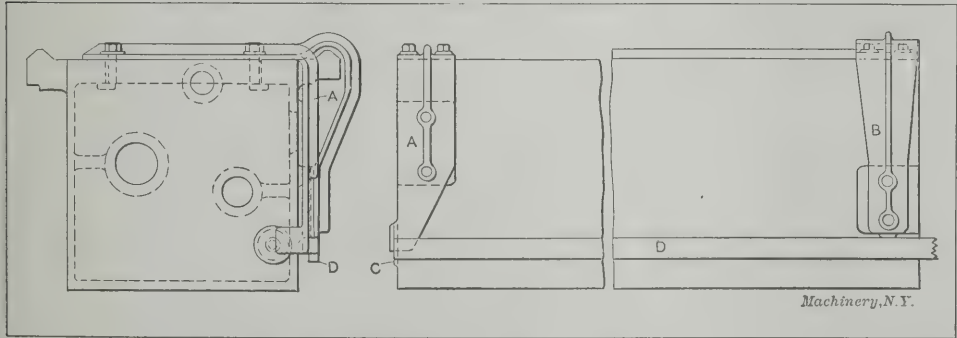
Jigs used for Drilling Lead-screw Box Bolt Holes in the Bed
